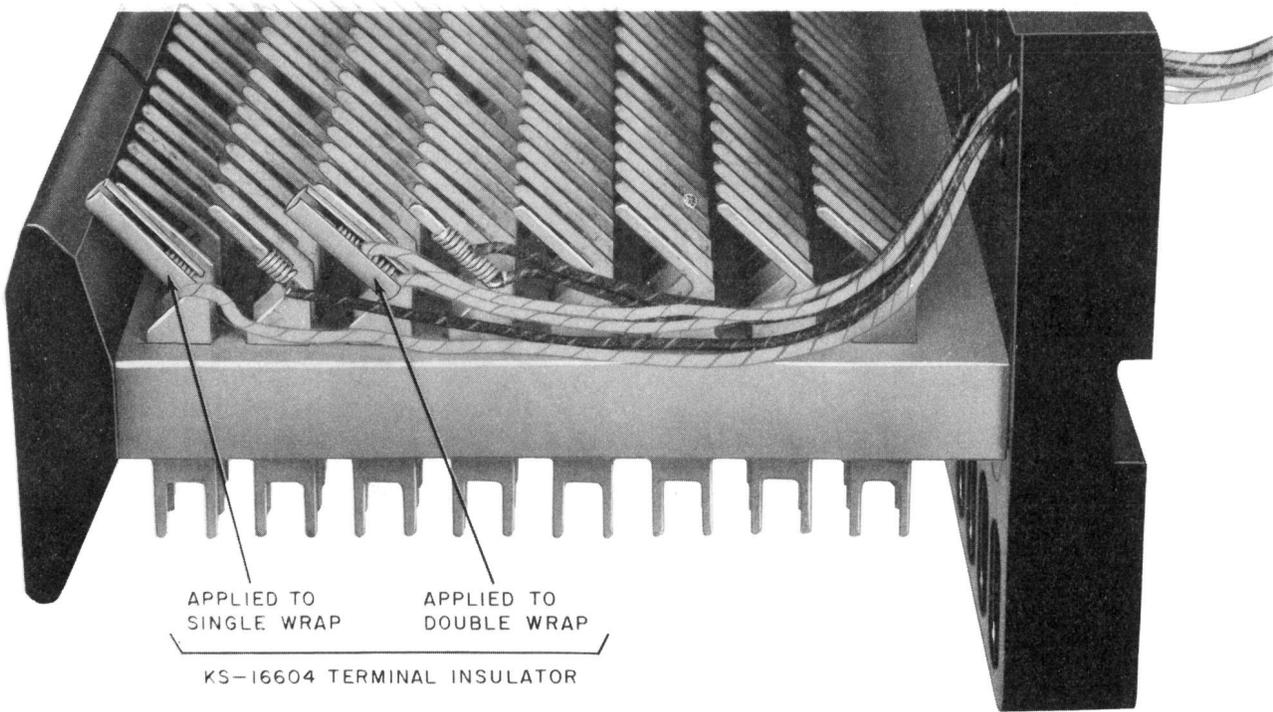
Protection of Special Lines—Typical 336-Type Connector
